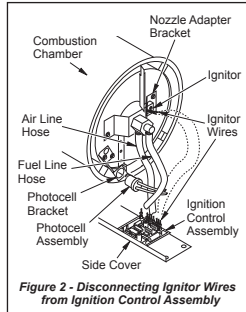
Disconnecting Ignitor Wires from Ignition Control Assembly
